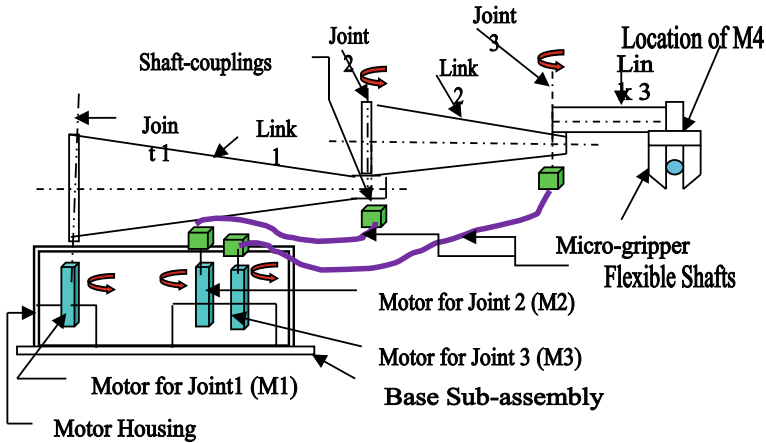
Schematic of the three-link flexible shaft-driven FRS
